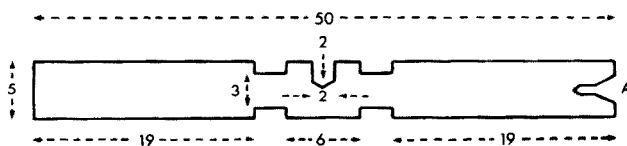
Diagram of the carbon-rod used in the atomizer; dimensions in mm. A Centre-drilled hole for machining in a lathe.
